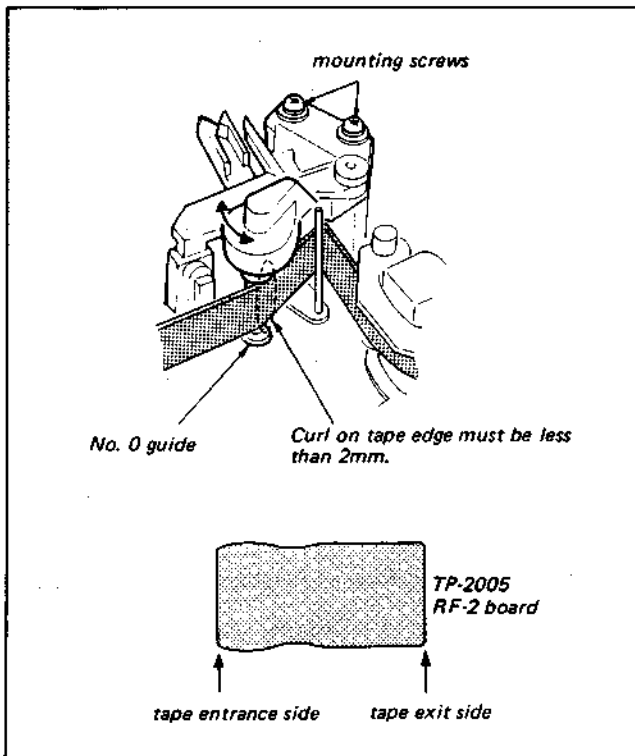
Position adjustment of No.0 guide section assembly mounting
